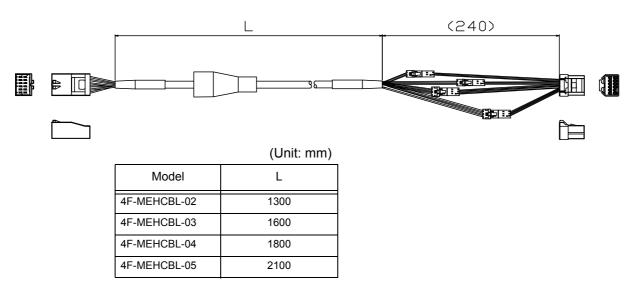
Outline drawing of the hand cable (4F-MEHCBL-02 to 05)
